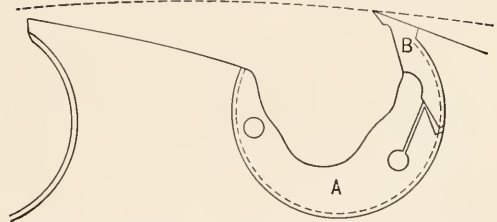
A Section of an Inserted-tooth Circular Saw Plate. A. Holder or Shank. B. Tooth.
